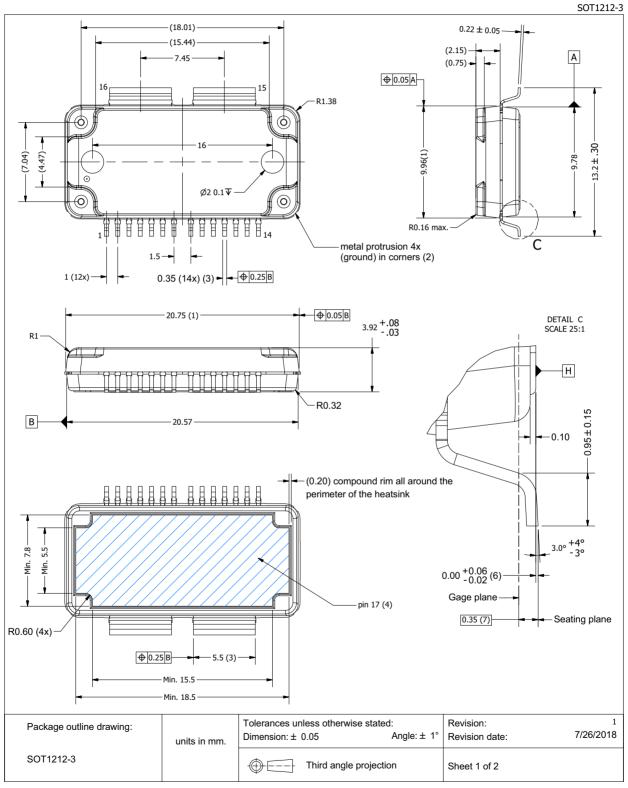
Package outline SOT1212-3 (sheet 1 of 2)
